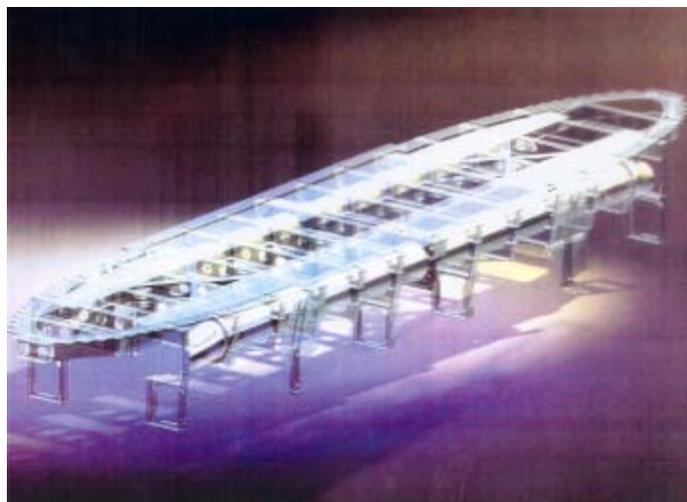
CAD-CAM Drawing of Aluminum Chassis for 60 foot Long Maglev-2000 Vehicle
